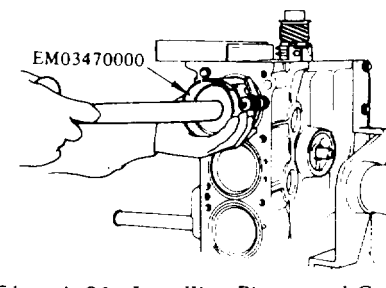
Installing Piston and Connecting Rod Assembly.
